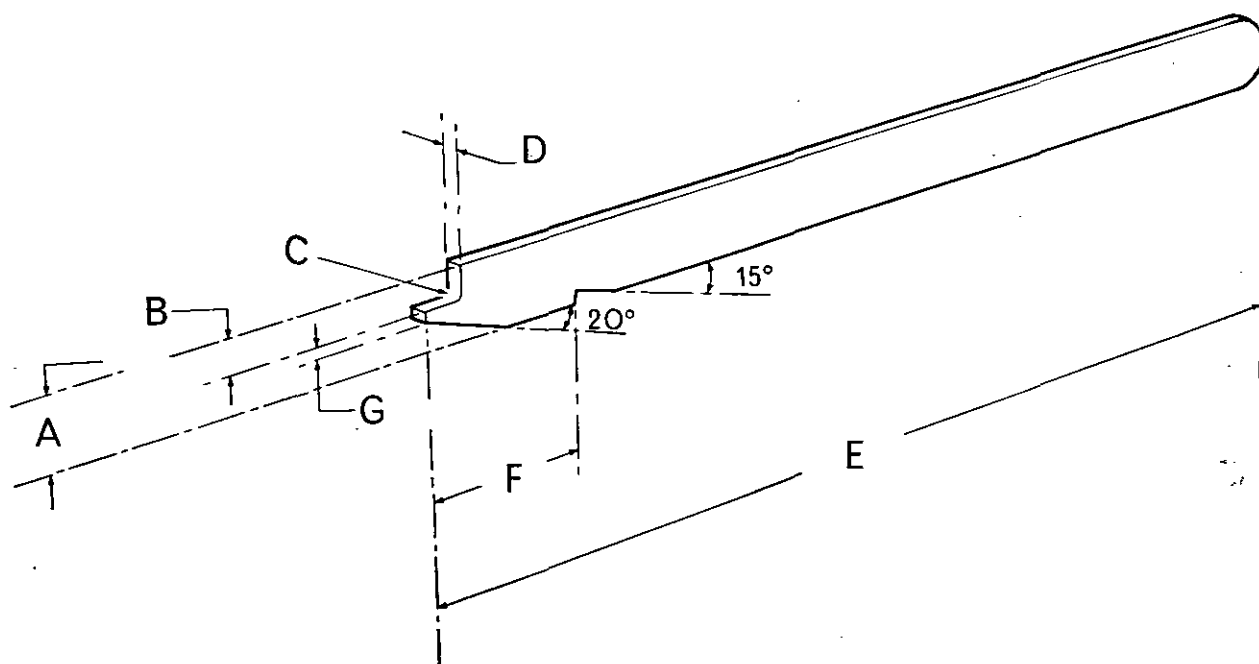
ANTI-RATTLE SPRING REPLACING TOOL — BORG AND BECK
